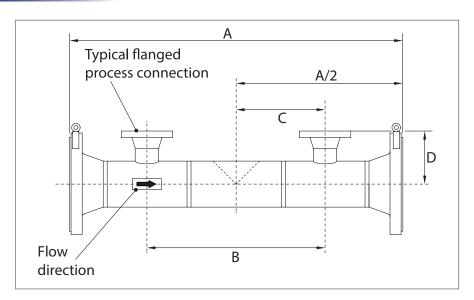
Tek-DP 1670A With Flanged Tappings and RFWN End Flanges (1 ½", 2 and 3")
